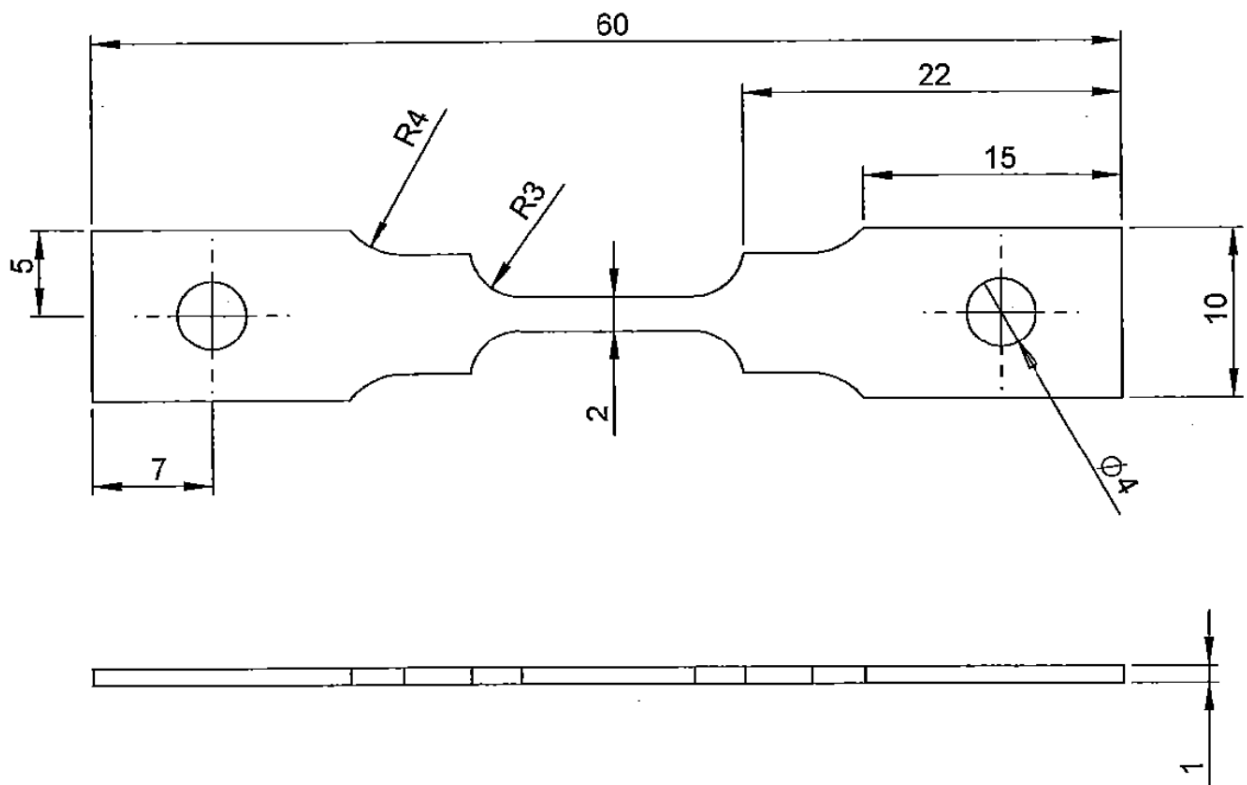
in situ* specimen geometry. Dimensions are in millimeters.
